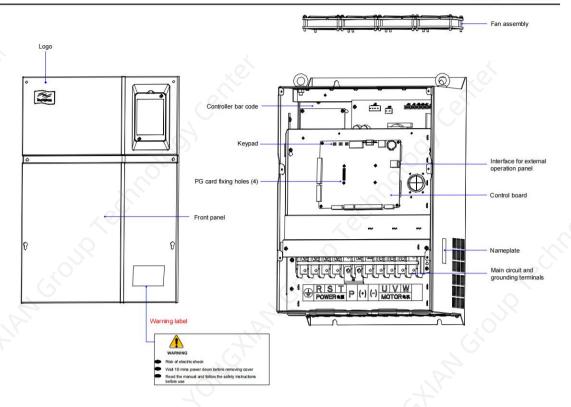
Component view of the sheet metal structure (NICE-L-C-4037 to NICE-L-C-4055)
